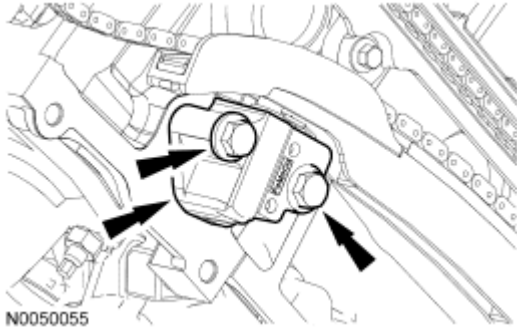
Locating RH Primary Timing Chain Tensioner Bolts
